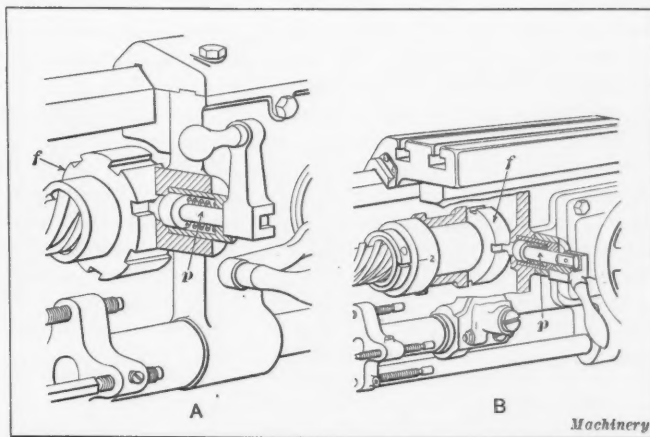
Thread-cutting Mechanism of Gisholt Turret Lathe
